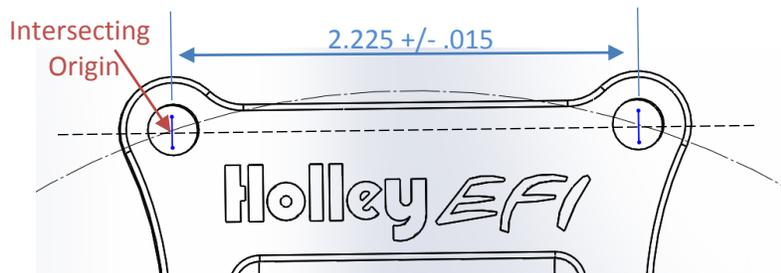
Marking the mounting plate for bracket mounting hole drilling
